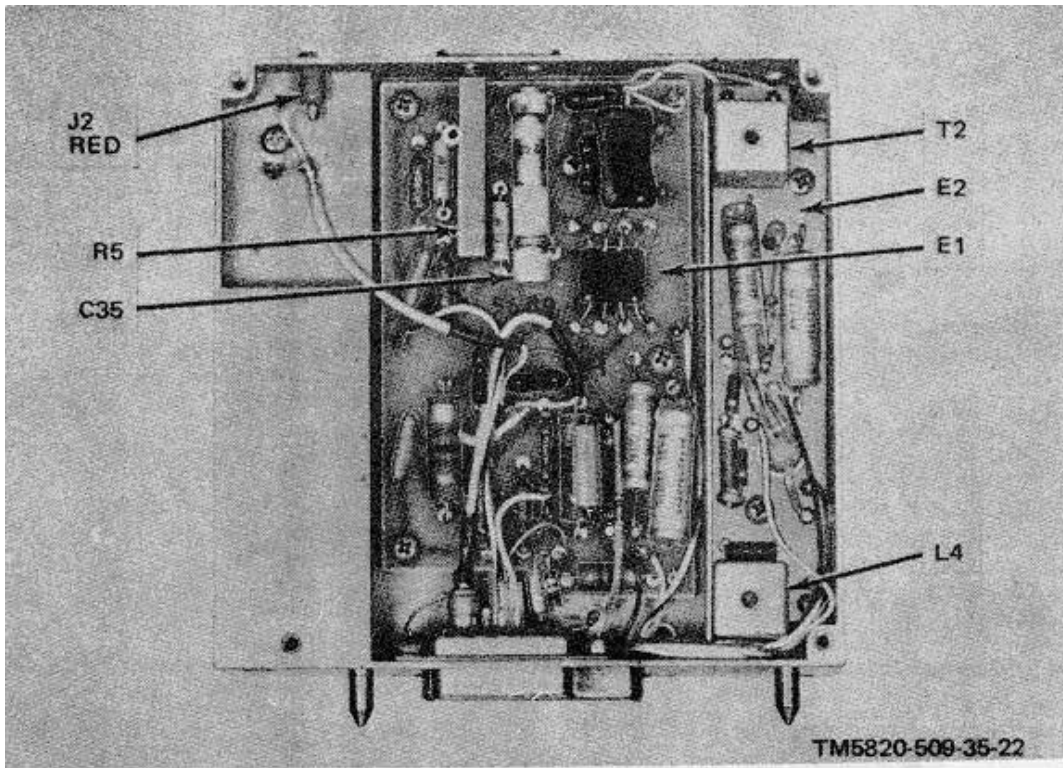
Amplifier-Modular AM-3507/PRC-47 (A8A2), Side View, Cover Removed, Location of Subassemblies E1 and E2 and Test Points
